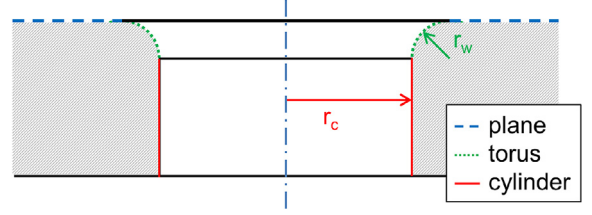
Cross section of deep-drawing tool with cylindrical borehole with radius  $r_c$  and drawing edge with radius  $r_w$ .
